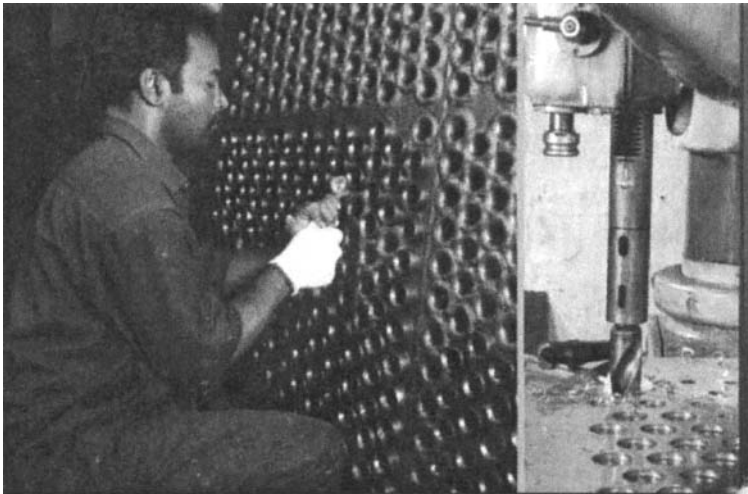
Rubber lining being done on a perforated plate- Insert- Holes are being punched in a metal plate by a drilling machine.
